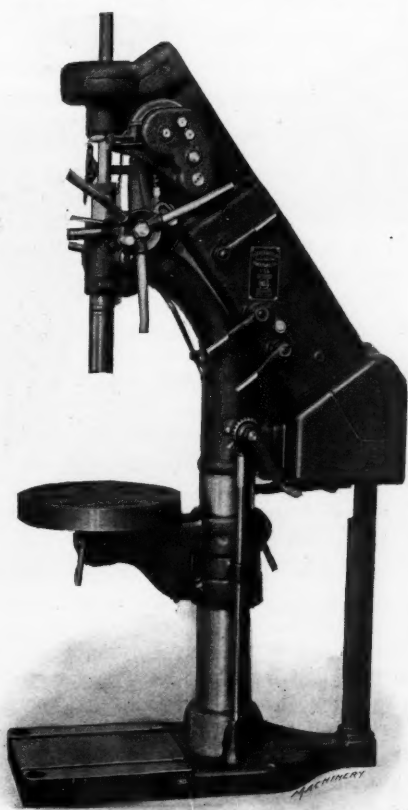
Barnes 20-inch All-g geared Drilling and Tapping Machine
